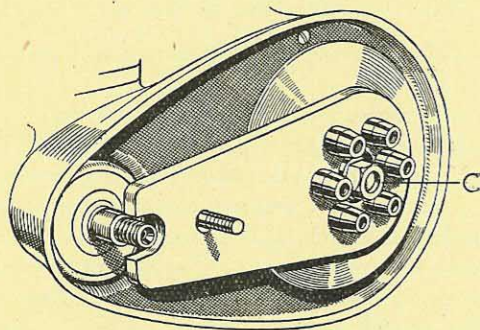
REMOVAL OF CLUTCH CENTRE NUT.
